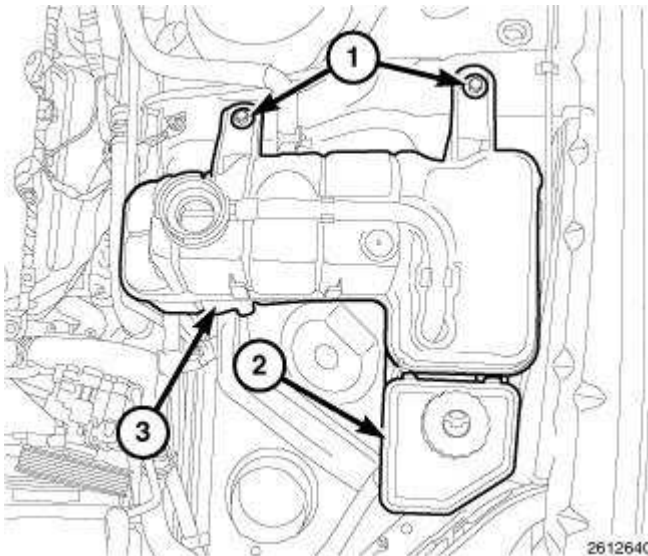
Bolts, Power Steering Reservoir & Coolant Reservoir
